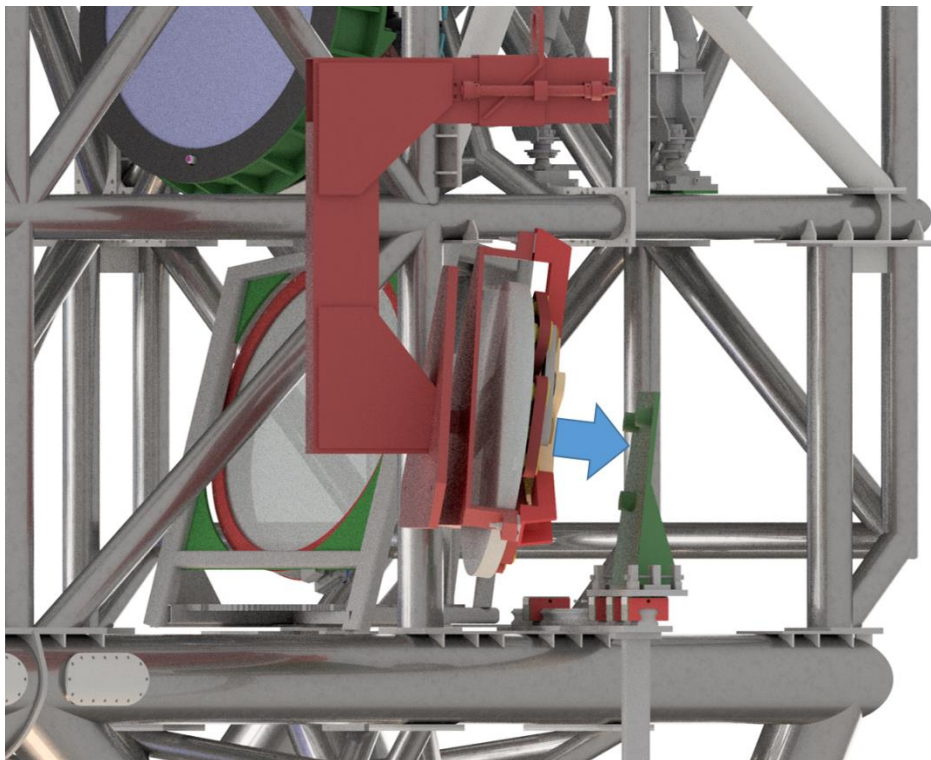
1st folding mirror LGSO on C-shaped handling approaching the sliding handling on the rail.
